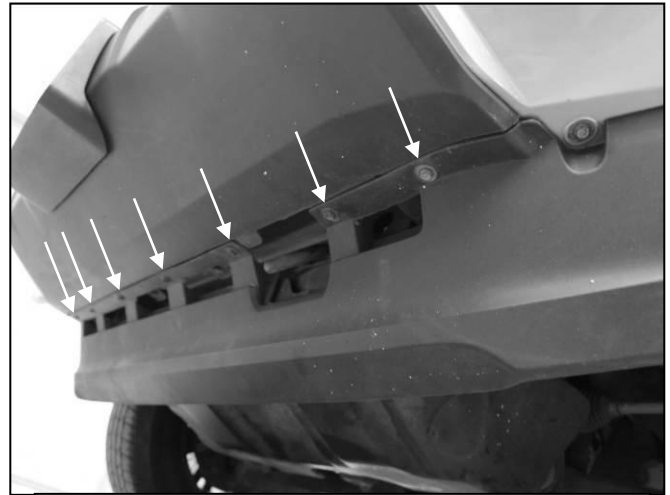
Models equipped with grille mounted sensor, unplug sensor before removing grille
